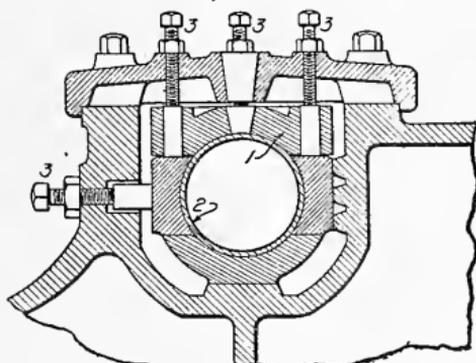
Section of Babbitt Lined, Quarter-Boxed Main Bearing
